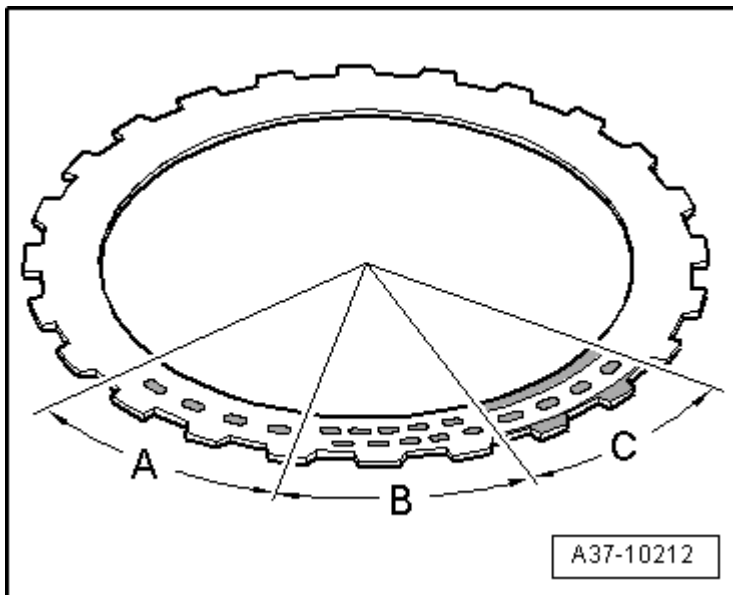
Checking Coated And Outer Plate For Wear And Overheating
